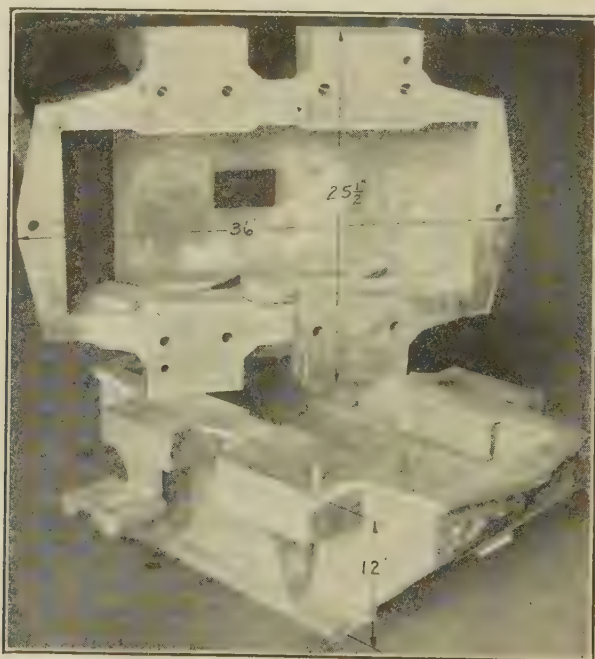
Arc-welded gear housing for 10-ton crane.
